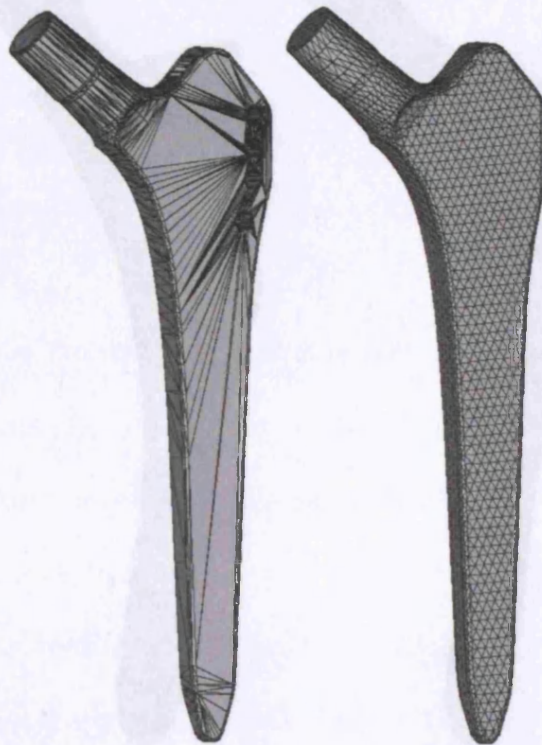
The original CAD drawing of an Alloclassic Hip Stem (left) received from the manufacturer and the completed triangular surface mesh.
